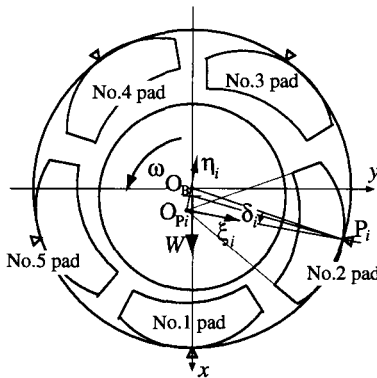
A schematic of 5 pad tilting-pad journal bearing
